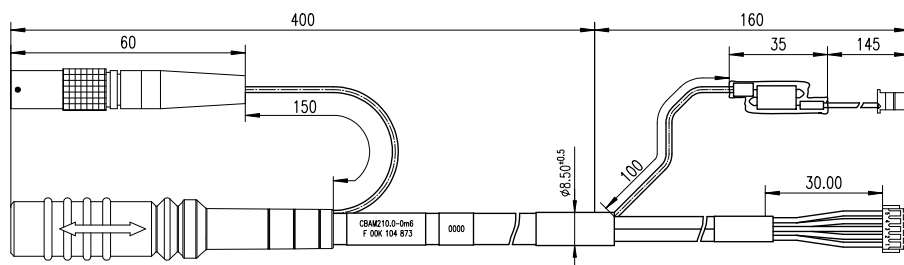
Combined Interface and Power Supply Cable CBAM210
